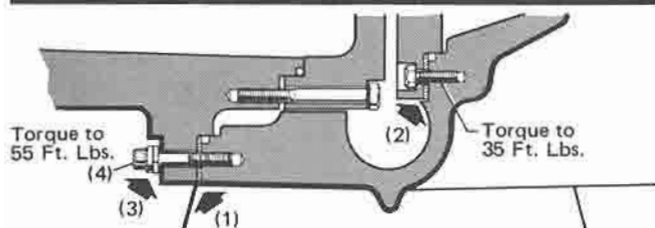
DISASSEMBLY AND ASSEMBLY OF OIL RESERVOIR COVER
